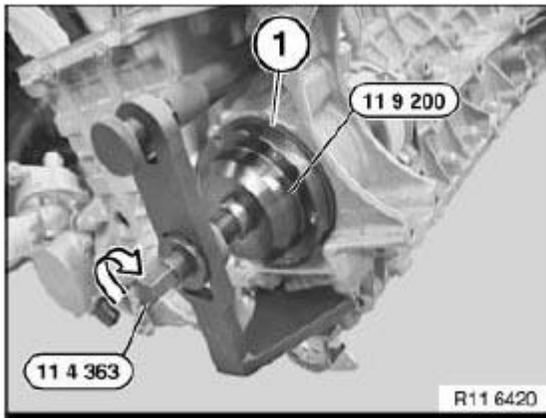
Identifying Special Tools (11 9 200 And 11 4 363)
